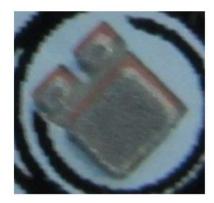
A poorly placed stencil may cause some of the solder paste to be deposited onto the solder mask, reducing the amount of solder paste which is available on the pads to establish a strong solder joint. In this example, the silk screened circles within the LUXEON package outline may also lift the stencil from the solder mask, compromising the quality of the solder paste deposition process.
